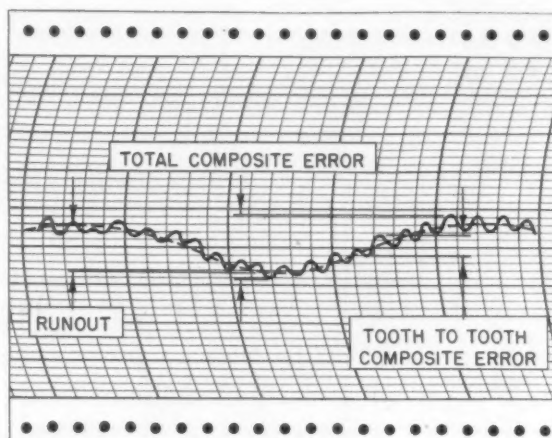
Recordings developed from gear rolling equipment are used to spot source of errors.
